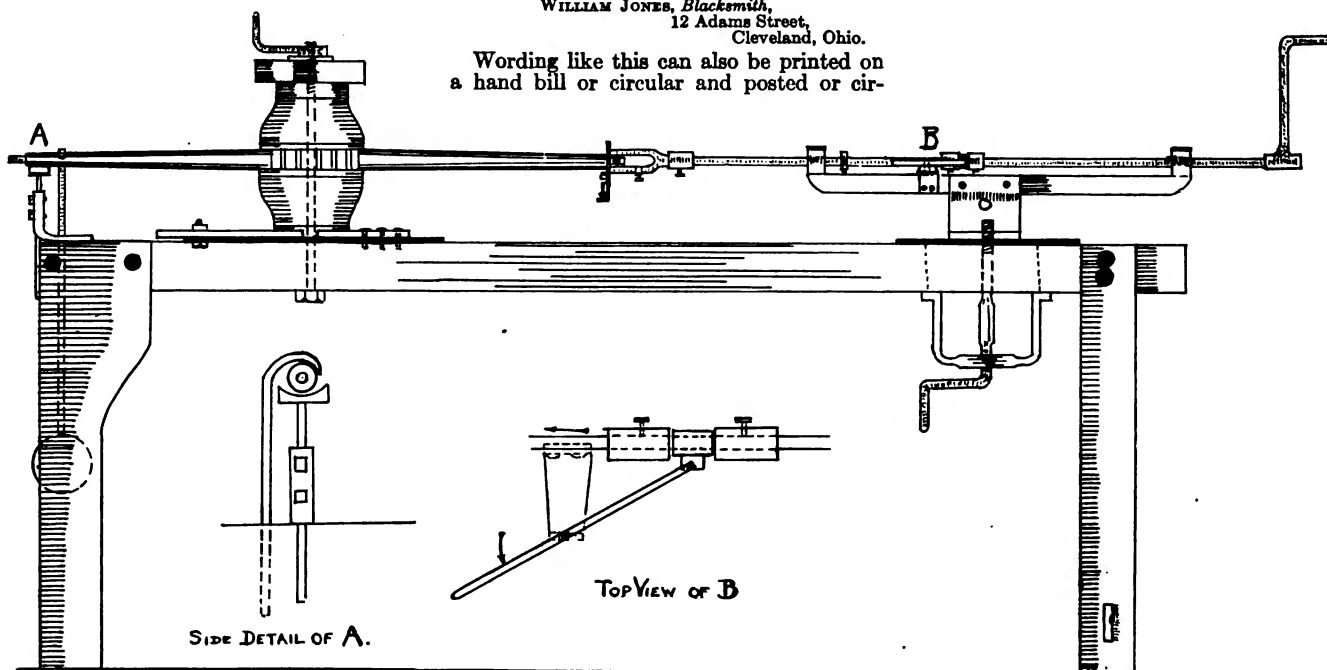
A SIDE VIEW OF THE SPOKE-TENONING MACHINE WITH DETAILS OF PARTS
